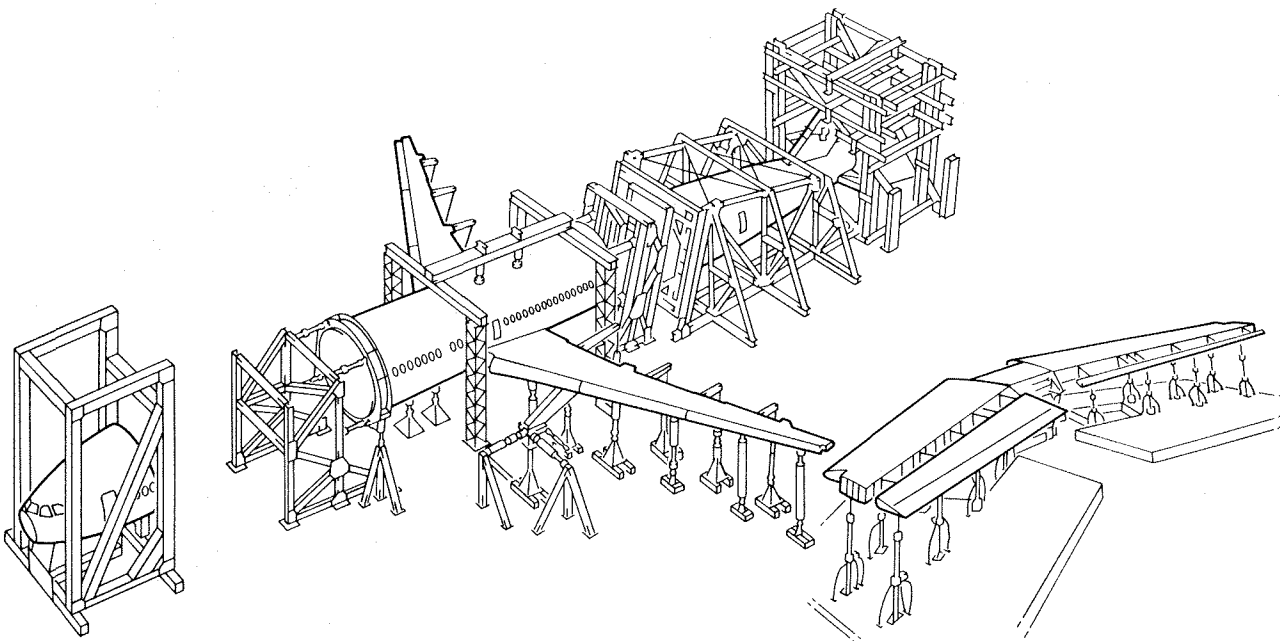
A310 Full Scale Fatigue and Damage Tolerance Tests
